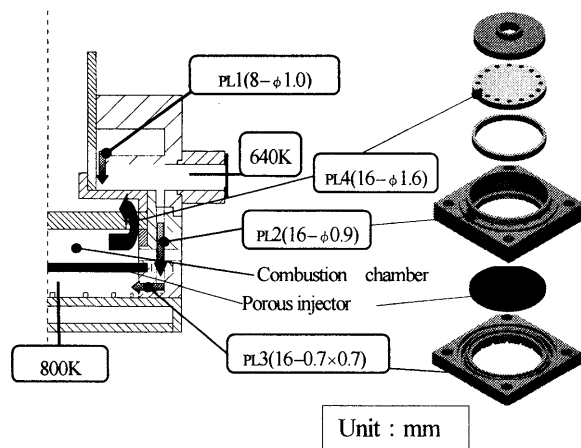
Gas flow duct and 3D sectional view of the improved engineering-model ultra-micro combustor
